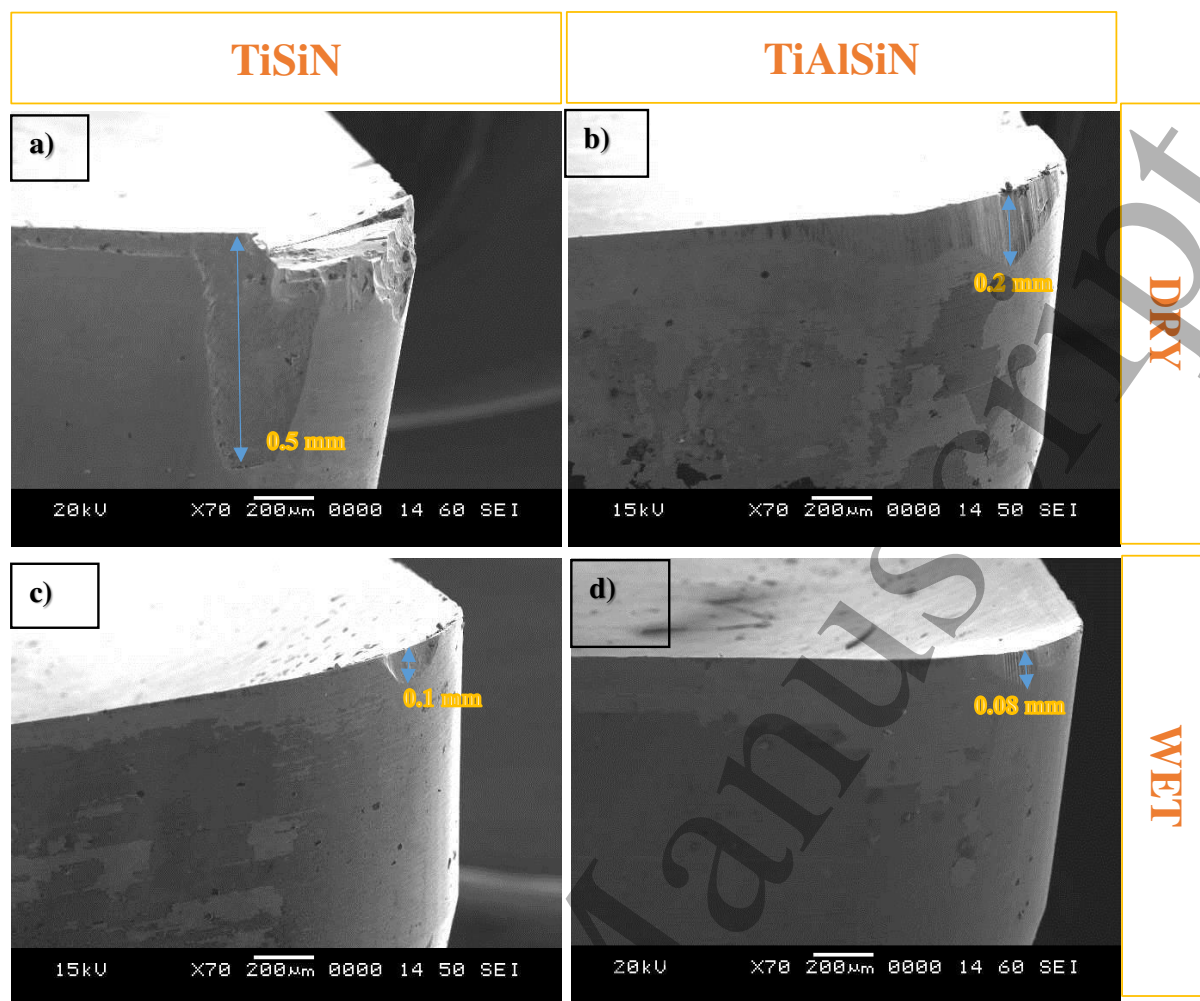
Flank wear of coated inserts at a spindle speed of 540 rpm a) TiSiN coated inert under dry environment b) TiAlSiN coated insert under dry environment c) TiSiN coated insert under wet environment d) TiAlSiN coated insert under wet environment
